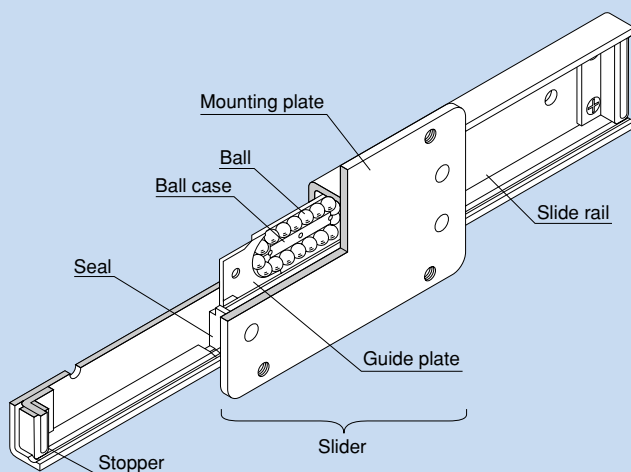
Structure of Slide Pack Model FBW-R (H) UU
